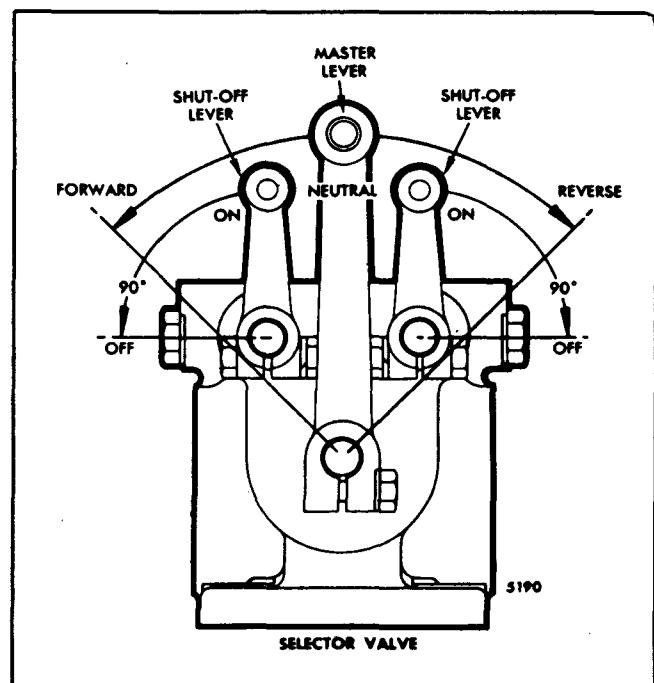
Lever Arrangement on Tandem Twin Engine Marine Gear Selector Valve
